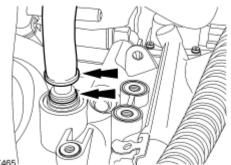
Locating Evaporative Emissions (EVAP) Tube From Intake Manifold Courtesy of FORD MOTOR CO.
